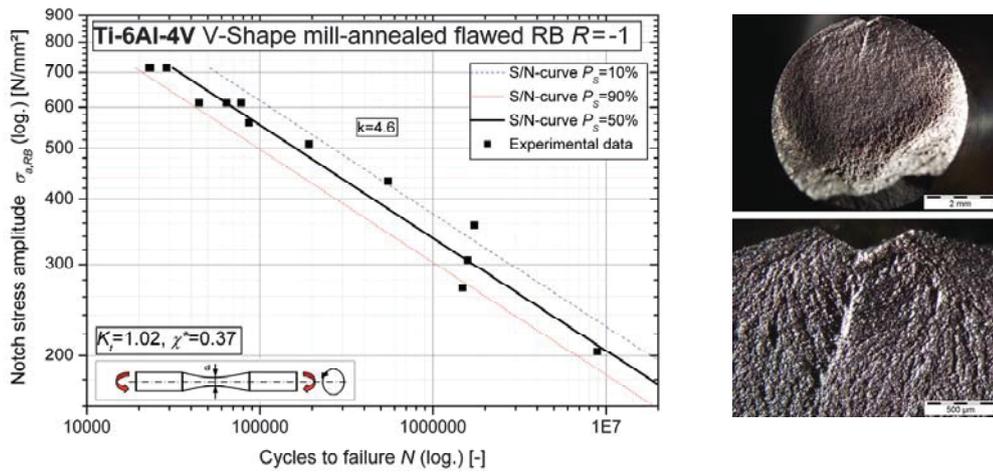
Rotating bending S/N-curve (l) and fracture surface (r) for V-shape mill-annealed flawed
